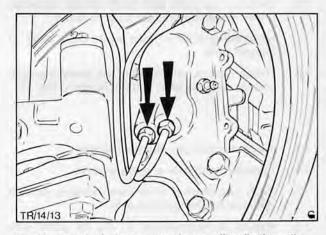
Front brake hose connection to caliper (horizontally split braking system shown)
